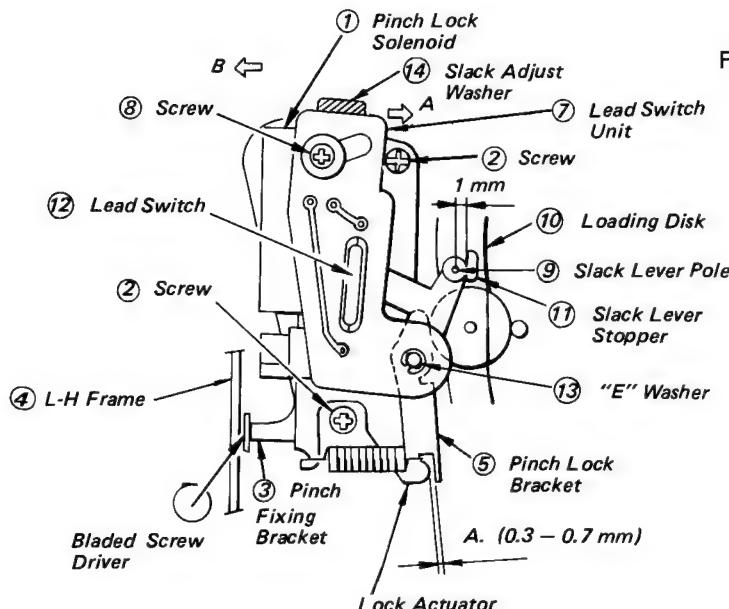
Pinch Lock Assembly Checking, Pinch Roller Pressure Adjustment, and Lead Switch Unit Positioning
